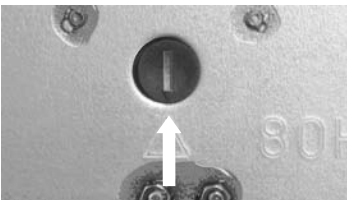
Diaphragm protective switch not activated. (Pump switched on)
